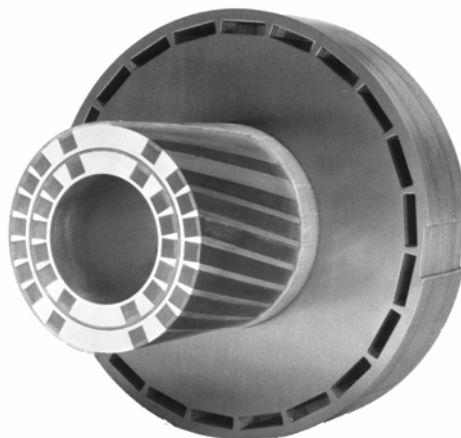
Photograph of a section cut from a prototype helical magnet.
